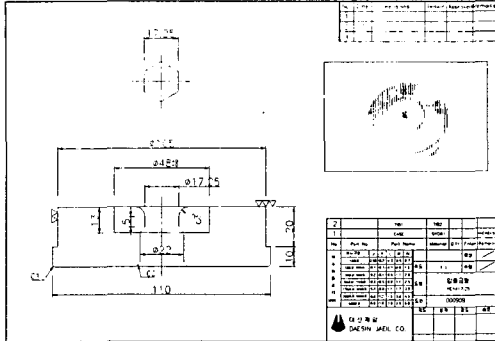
Hexagonal shape drawing of ceramic insert and hot extrusion dies
